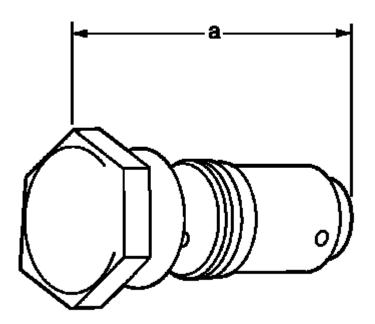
Measuring Timing Chain Tensioner Assembly Courtesy of GENERAL MOTORS COMPANY
